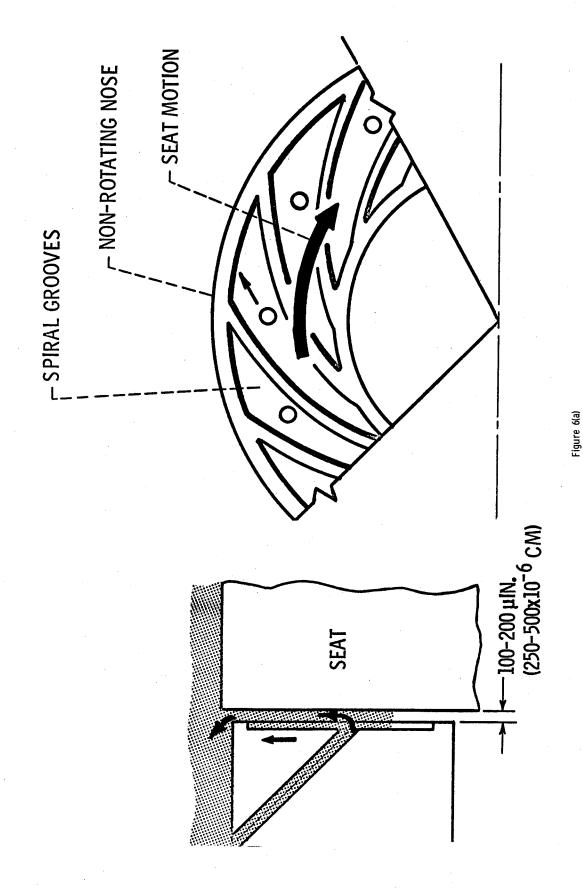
shows a conventional rotating shaft face seal assembly as used on hydraulic motors in aircraft but not originally intended for exposure to vacuum. This type of seal would have the two-phase interface film described in both atmosphere and vacuum. An improved seal design for vacuum is suggested in figure 6. This design utilizes a spiral groove radially outward pumping face seal with interface liquid feed to remove heat generated in shear of the thin (100 to 200 microinch or 2.5 to 5.1 µm) film. Further, a helical groove molecular flow vapor seal with low surface energy barrier films is provided to contain leakage past the spiral groove liquid seal. The barrier film should not be wet by the sealed liquid.
